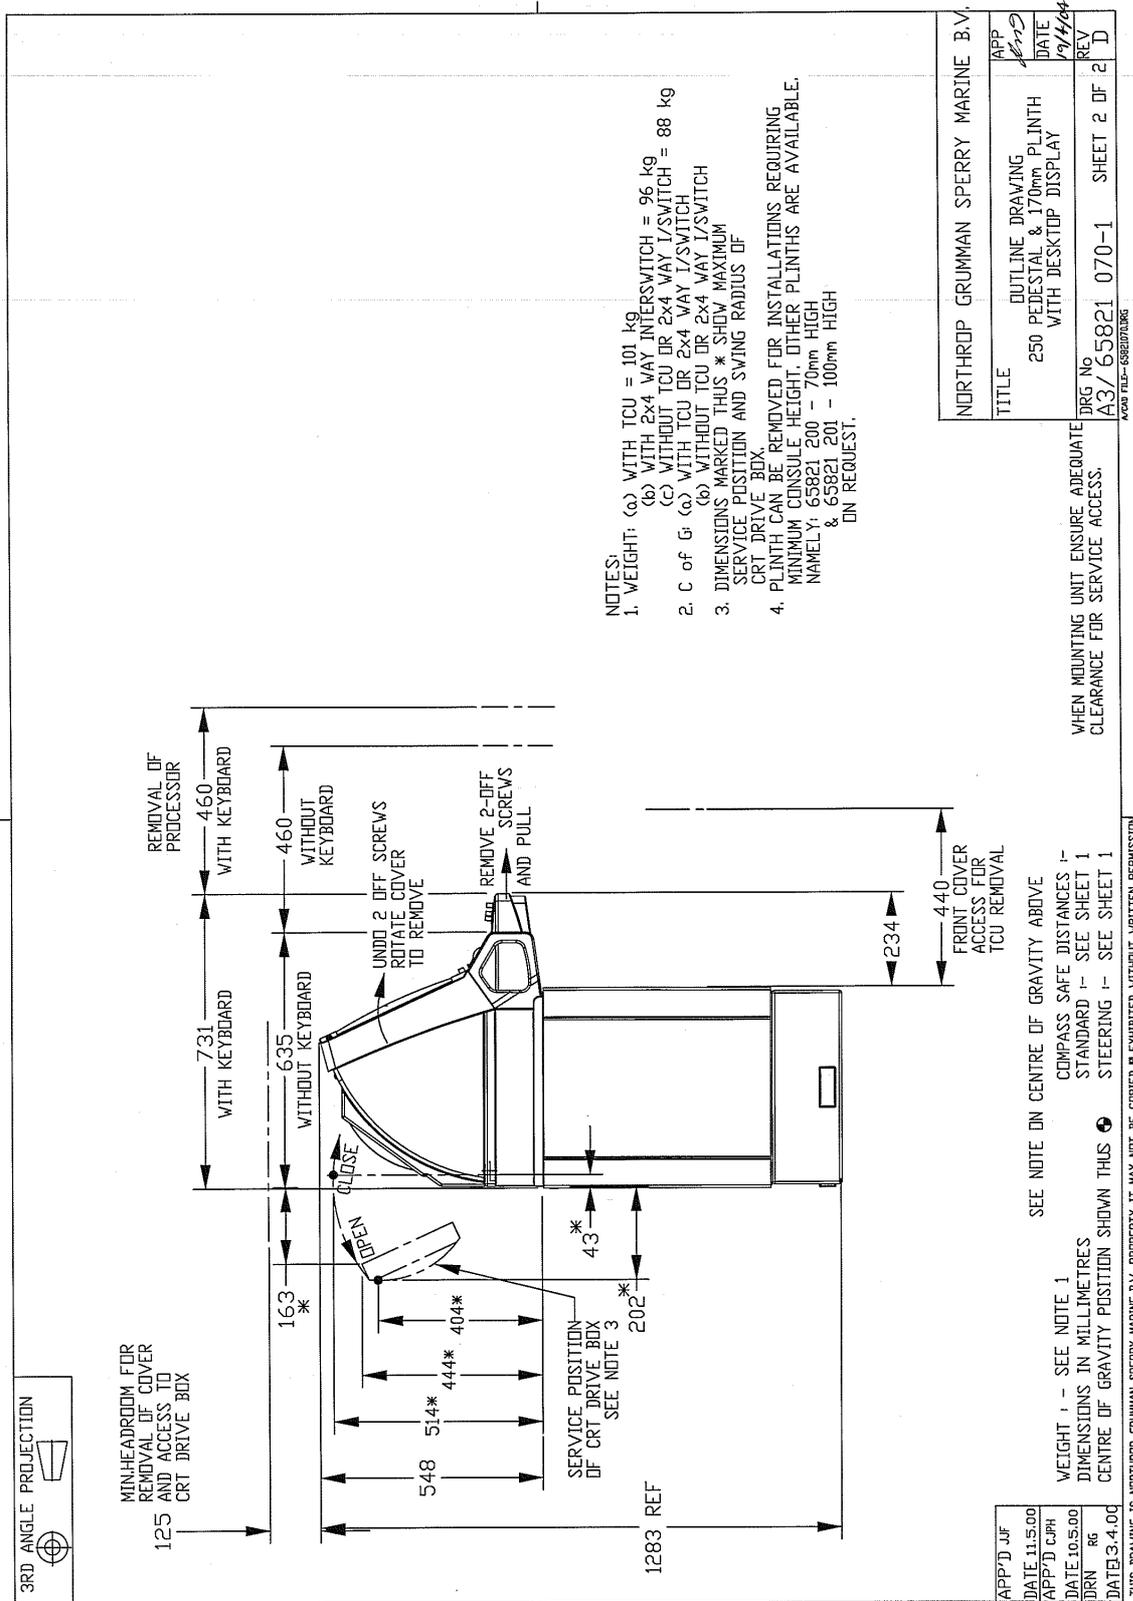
250 Display Unit (CRT with Pedestal) Outline Drawing
